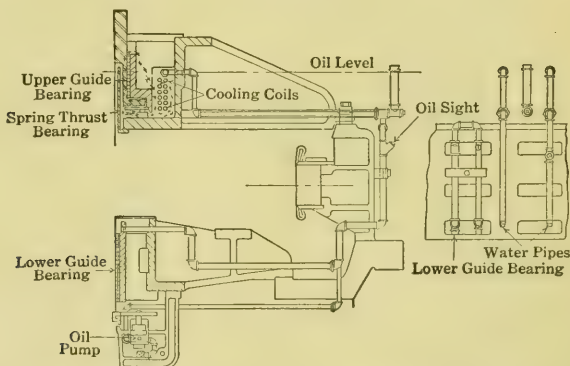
Arrangement of Oil and Water Pipes on Self-oiling Vertical-Shaft Generators Having a Combined Thrust and Upper Guide Bearing.
